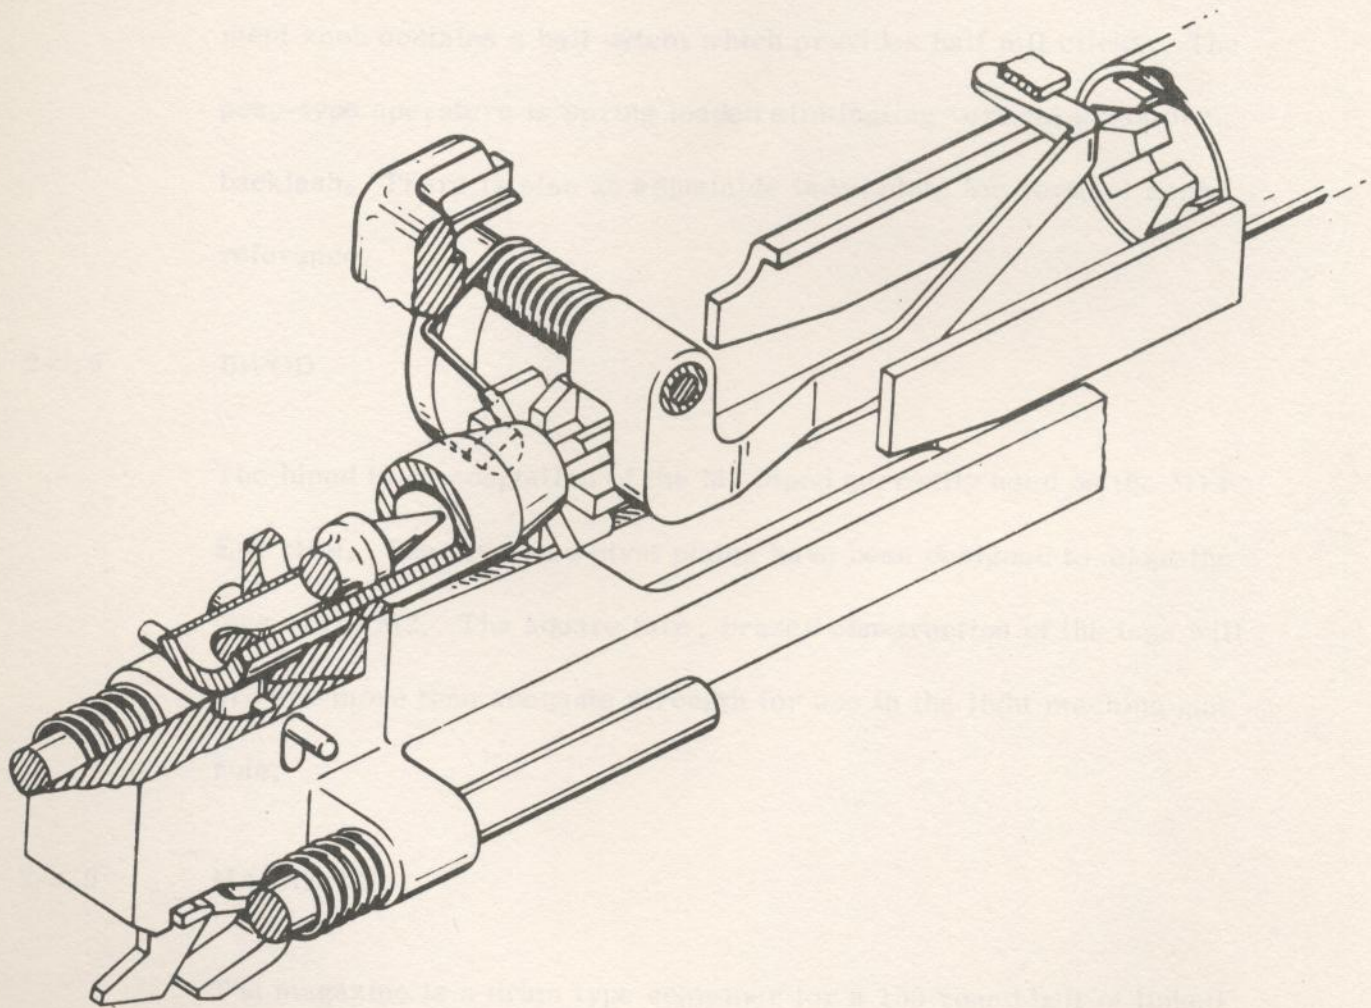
Cutaway - CMG-2 Firing Pin, Bolt, Ejector
